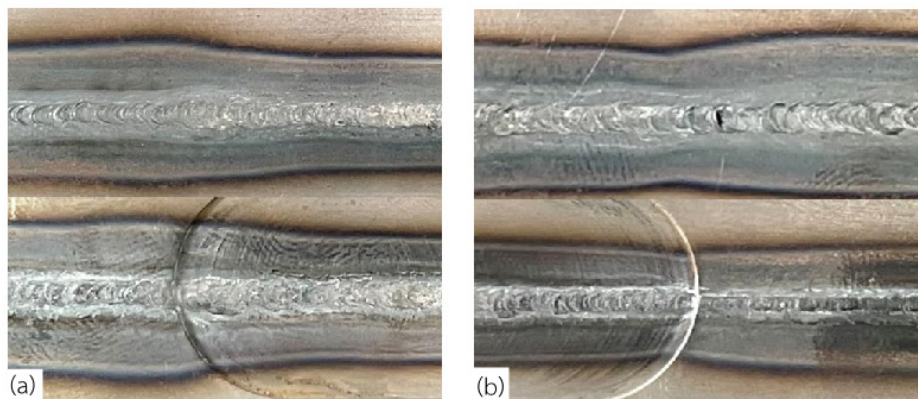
Show enlarged image the bead of laser welding of close loop PID by control AVG.
